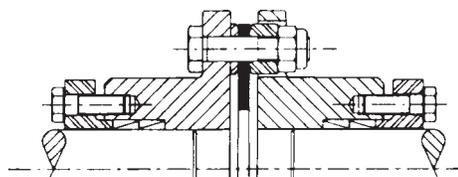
Single flexing coupling fastened with Ringfeder Locking elements.
